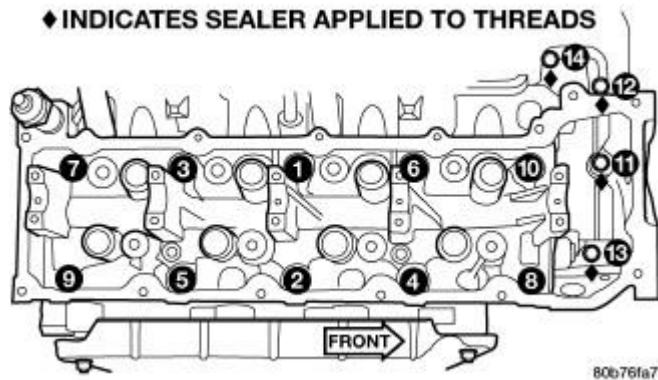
Cylinder Head Bolts Removal/Tightening Sequence
